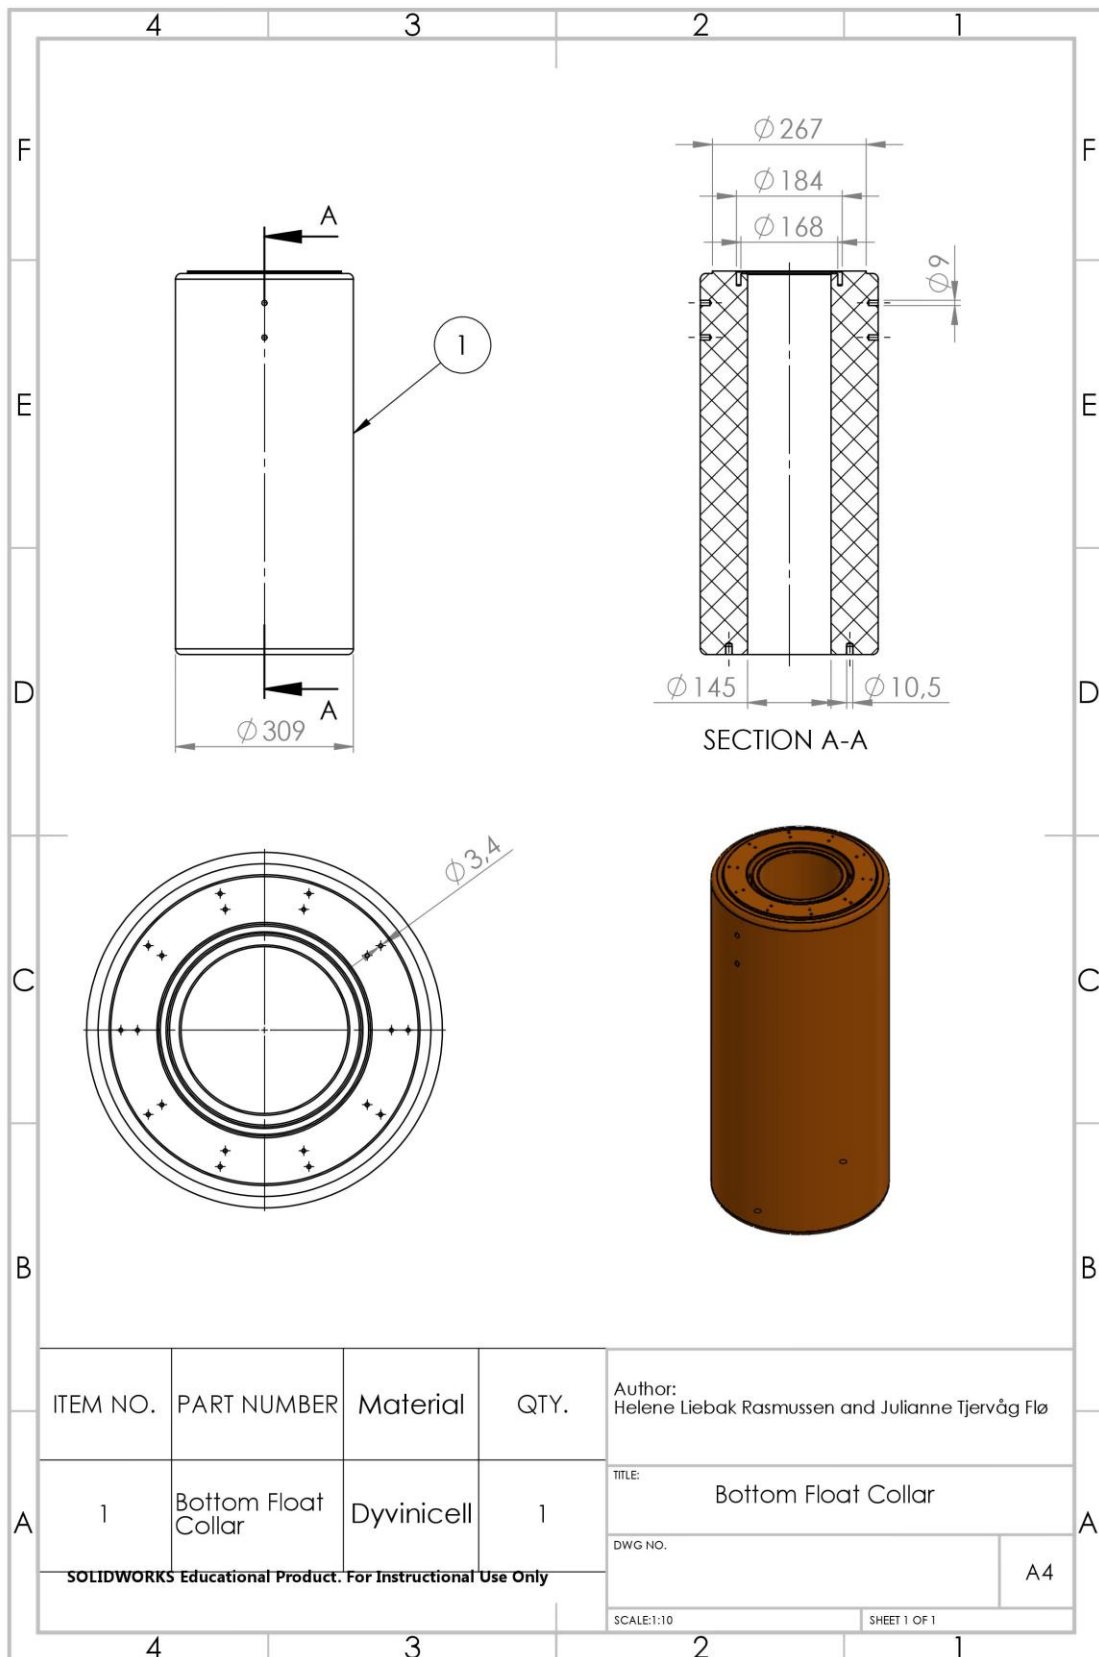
Technical drawing of the bottom float collar. Created in SolidWorks
